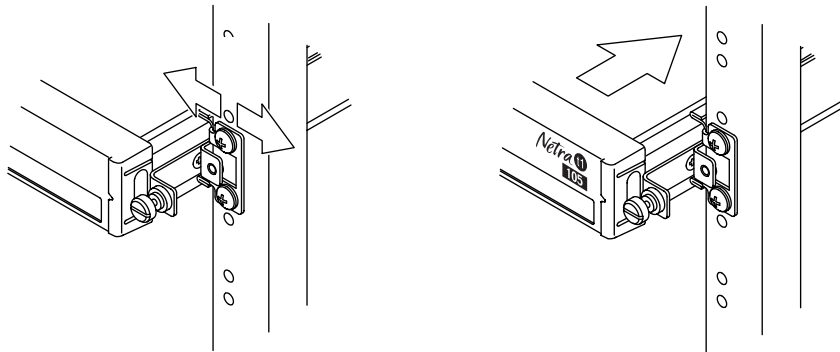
Adjusting the Mount and Tightening the Thumbscrew
